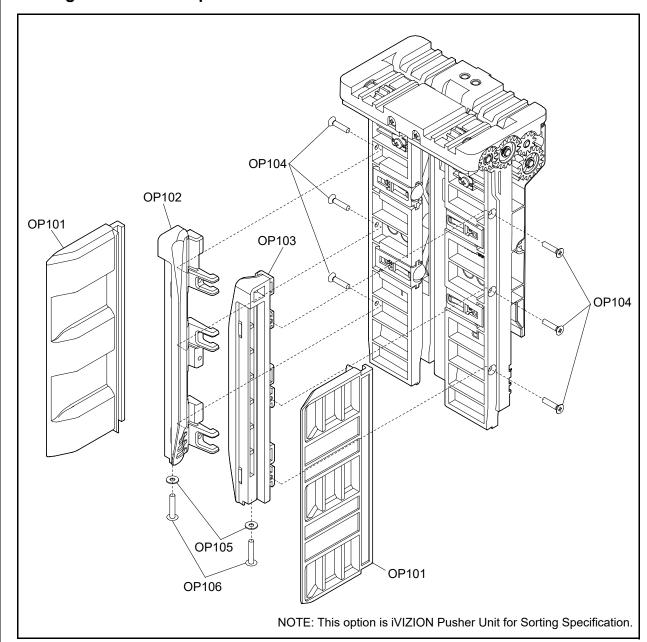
iVIZION Optional Components - Sorting Pusher Unit Exploded Views
